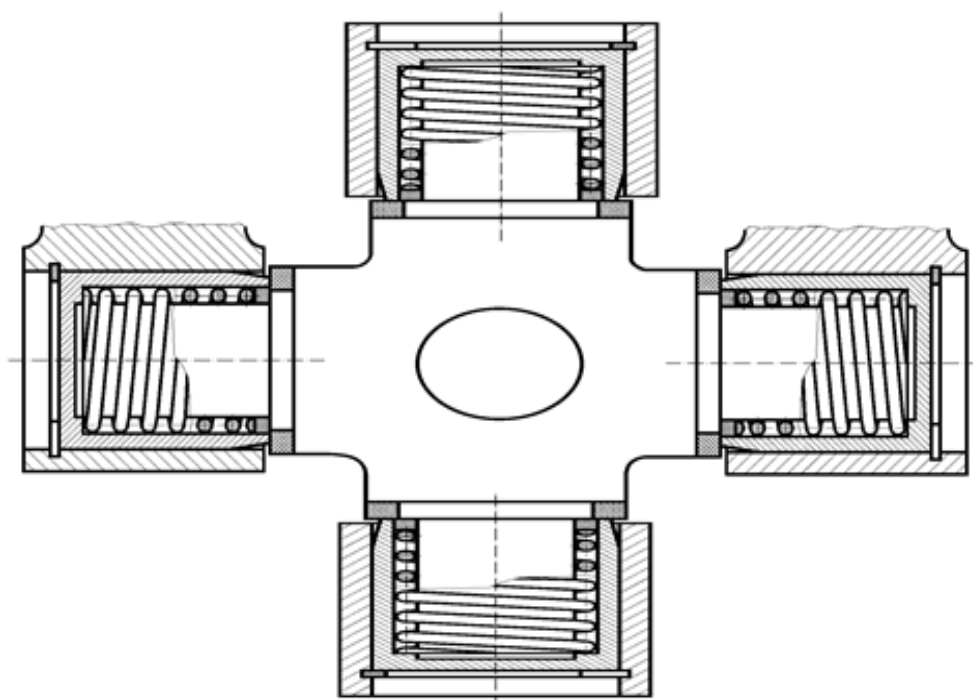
Diagram and appearance of the modernized crosspiece of the car
